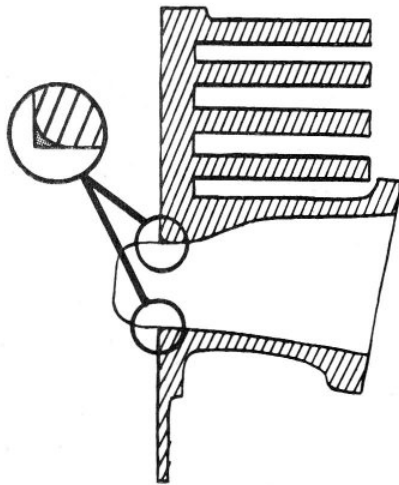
Some manufacturers recommend that edges of ports be chamfered as shown in insert, after re boring.
